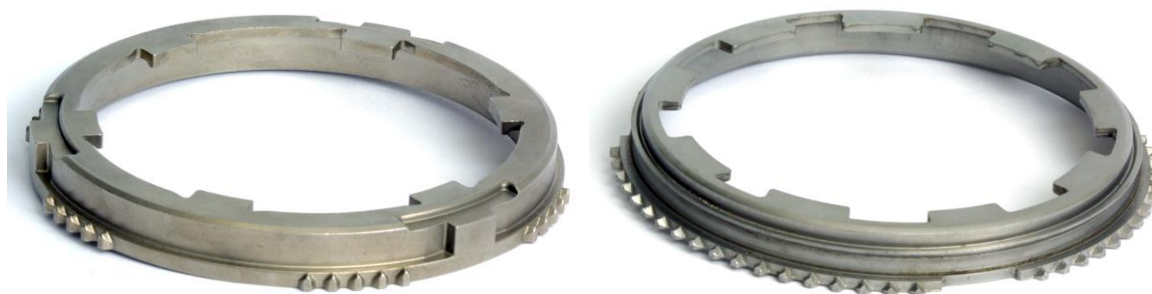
Die-pressed (GKN Sinter Metals) and fineblanked cast synchronizer ring (Fein-tool Lyss)
